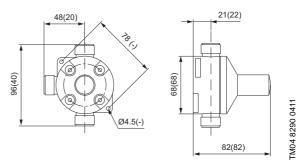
Pressure relief valve. Dimensions in brackets apply to stainless-steel version.
